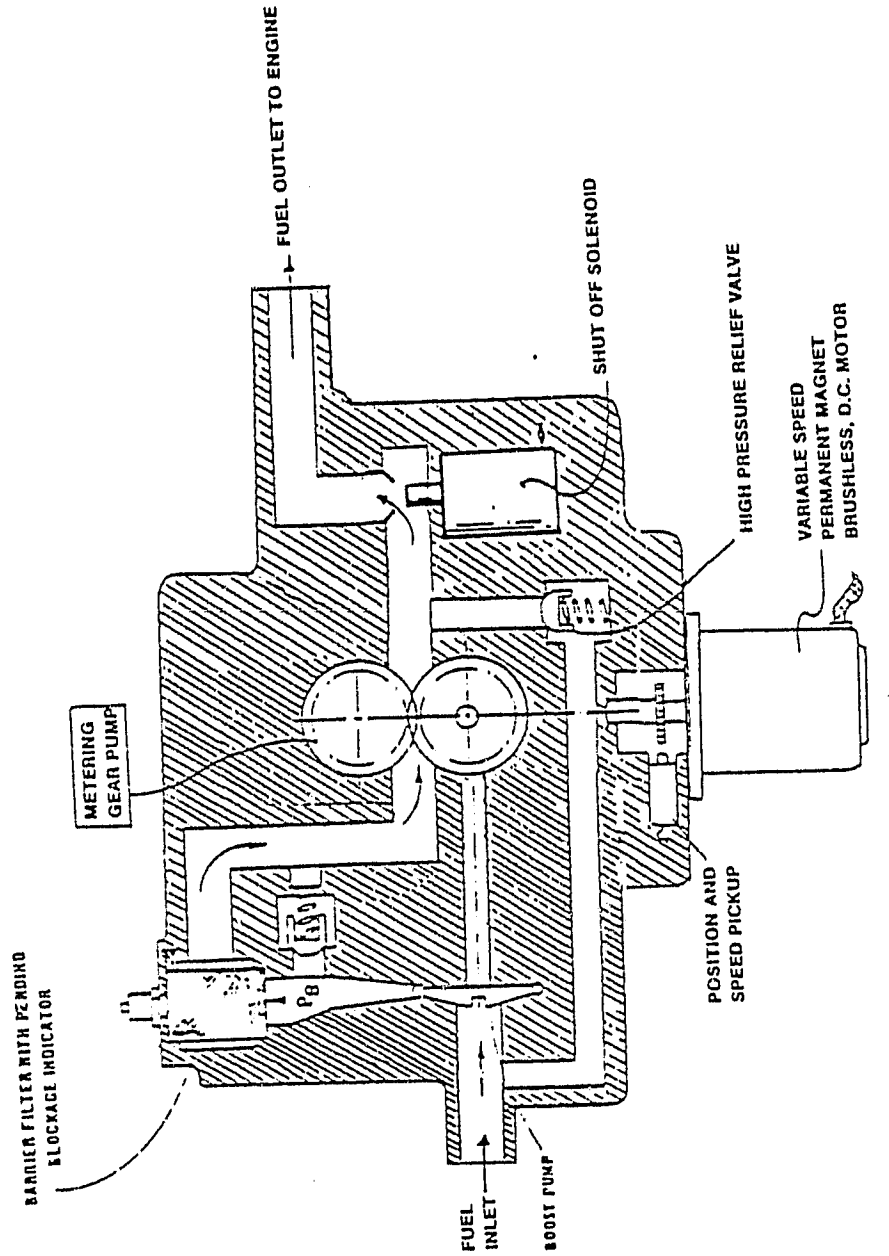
VARIABLE SPEED D.C. MOTOR CONTROLLED METERING GEAR PUMP (TANK MOUNTED)
